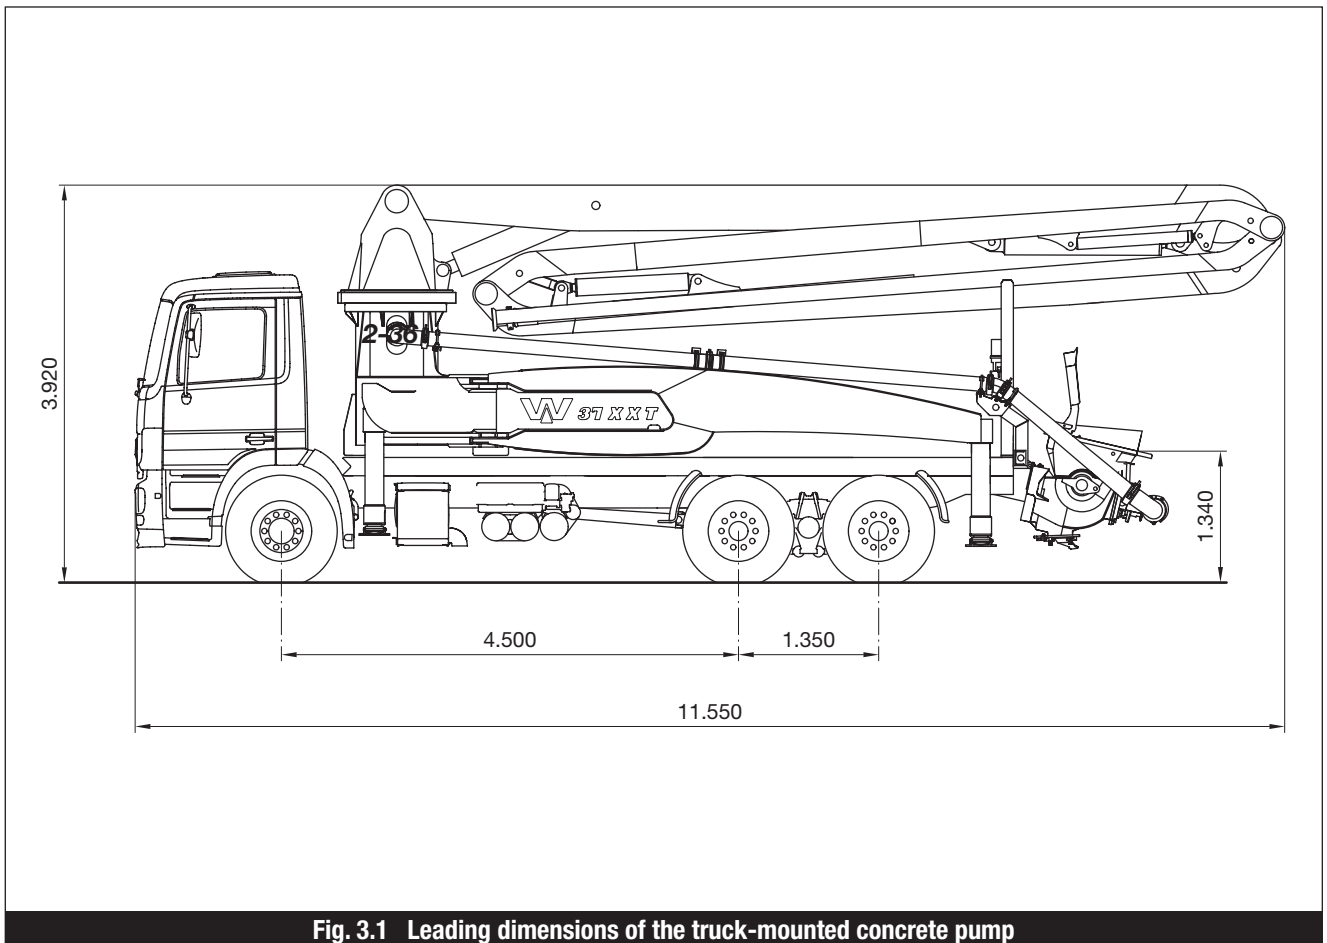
Leading dimensions of the truck-mounted concrete pump
